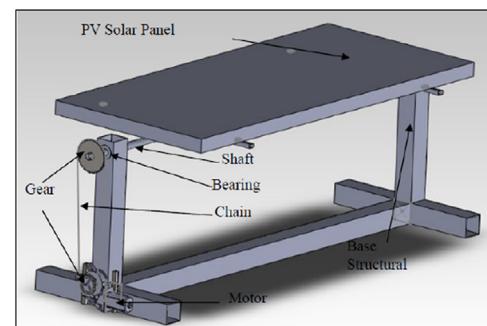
CAD drawing of Single-axis tracking PV [28].
